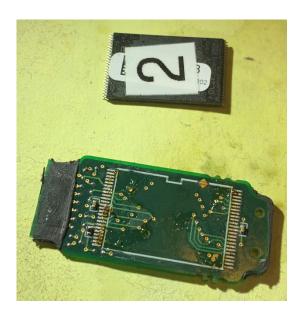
The Appareo Vision 1000 memory board after removal of one TSOP FLASH chip.
